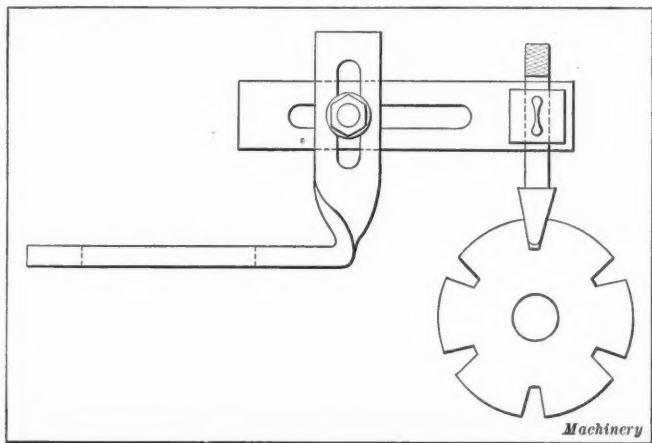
Tool Grinder Attachment for use in grinding Hobs
